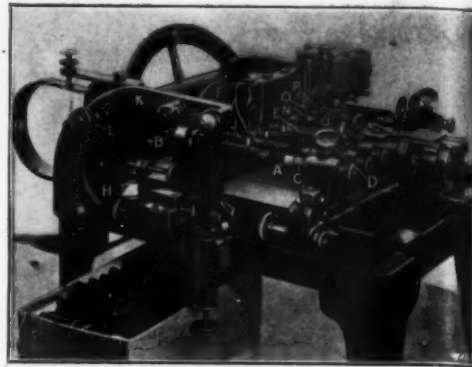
Special Automatic Machine for Chasing the Rubber Barrel and Cap.
